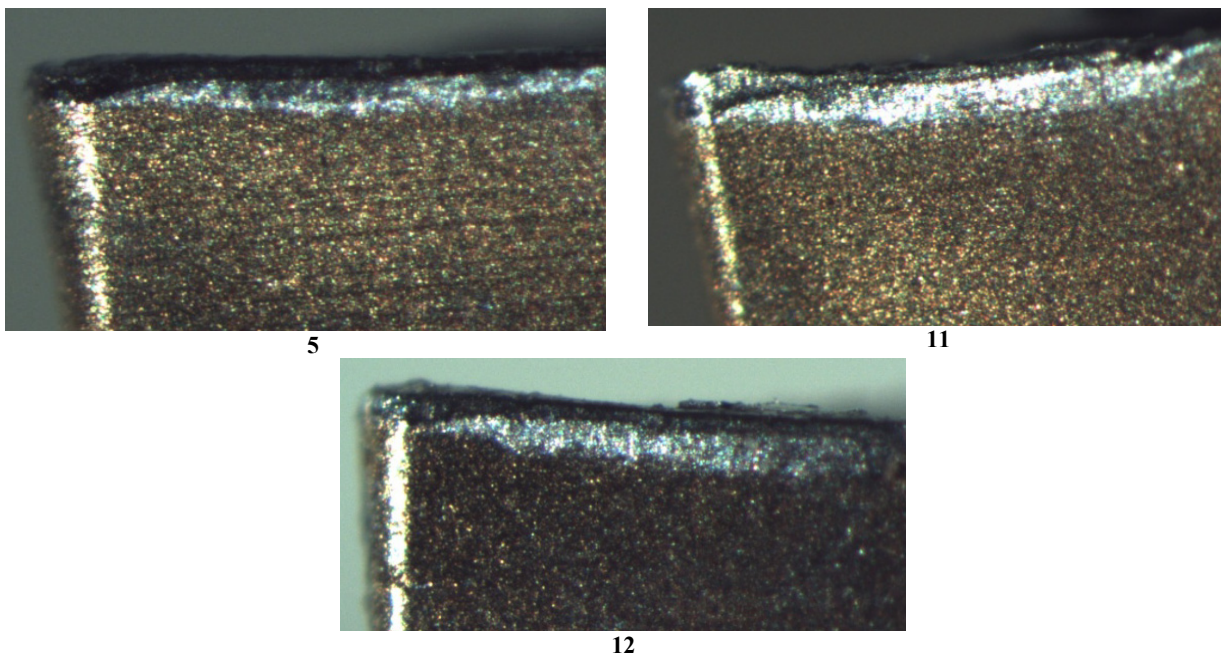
Cutting plates after machining of alloy samples with 0.05 % Ti (sample No. 5, 11, 12)
